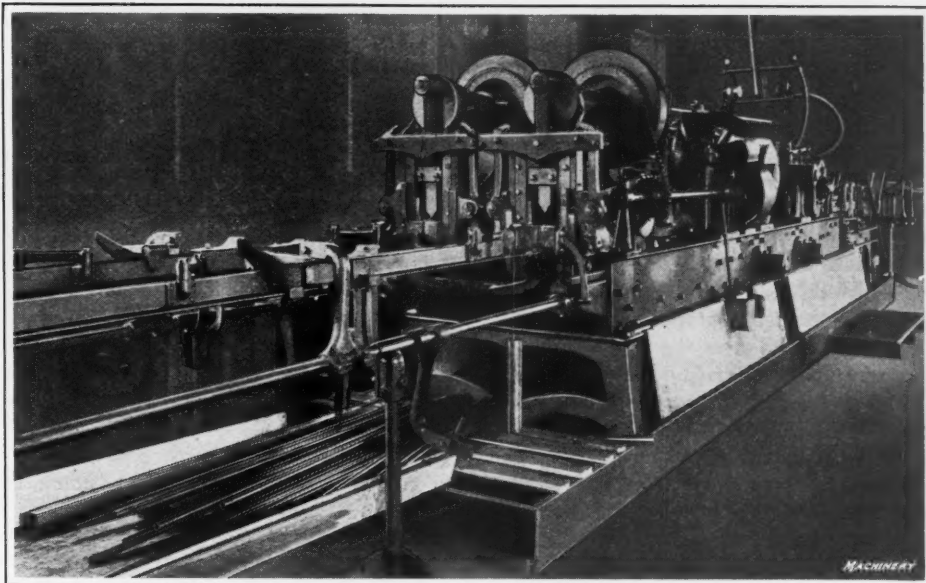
Opposite End of Automatic Tube-making Machine shown in Fig. 17; Flat Stock is fed into Machine at End shown in Fig. 17 and Finished Welded Tubing is withdrawn from End of Machine shown in This Illustration
